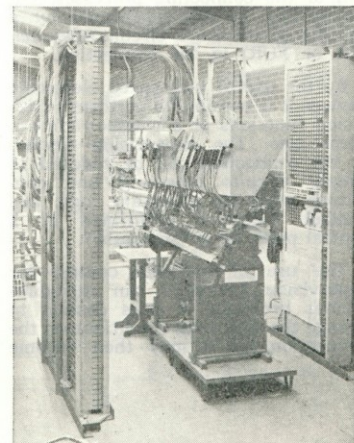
Automatic Test Equipment for the Final Inspection of Rack Wiring.
